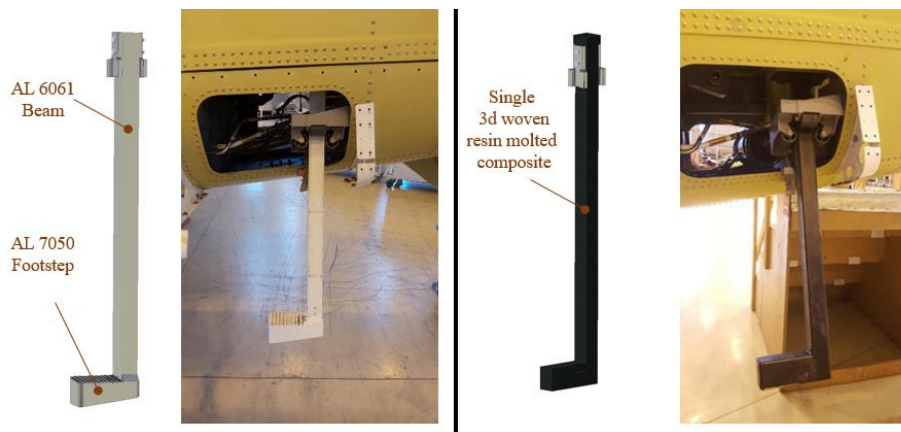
Existing aluminum and 3d woven boarding step designs on aircraft
